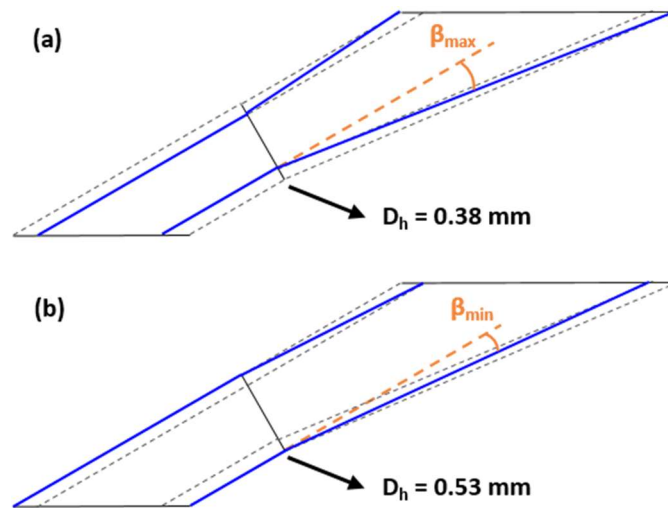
Side view of tolerances for shaped cooling holes, showing variations in acceptable cooling hole shapes for (a) the minimum possible meter diameter and (b) the maximum possible meter diameter.
